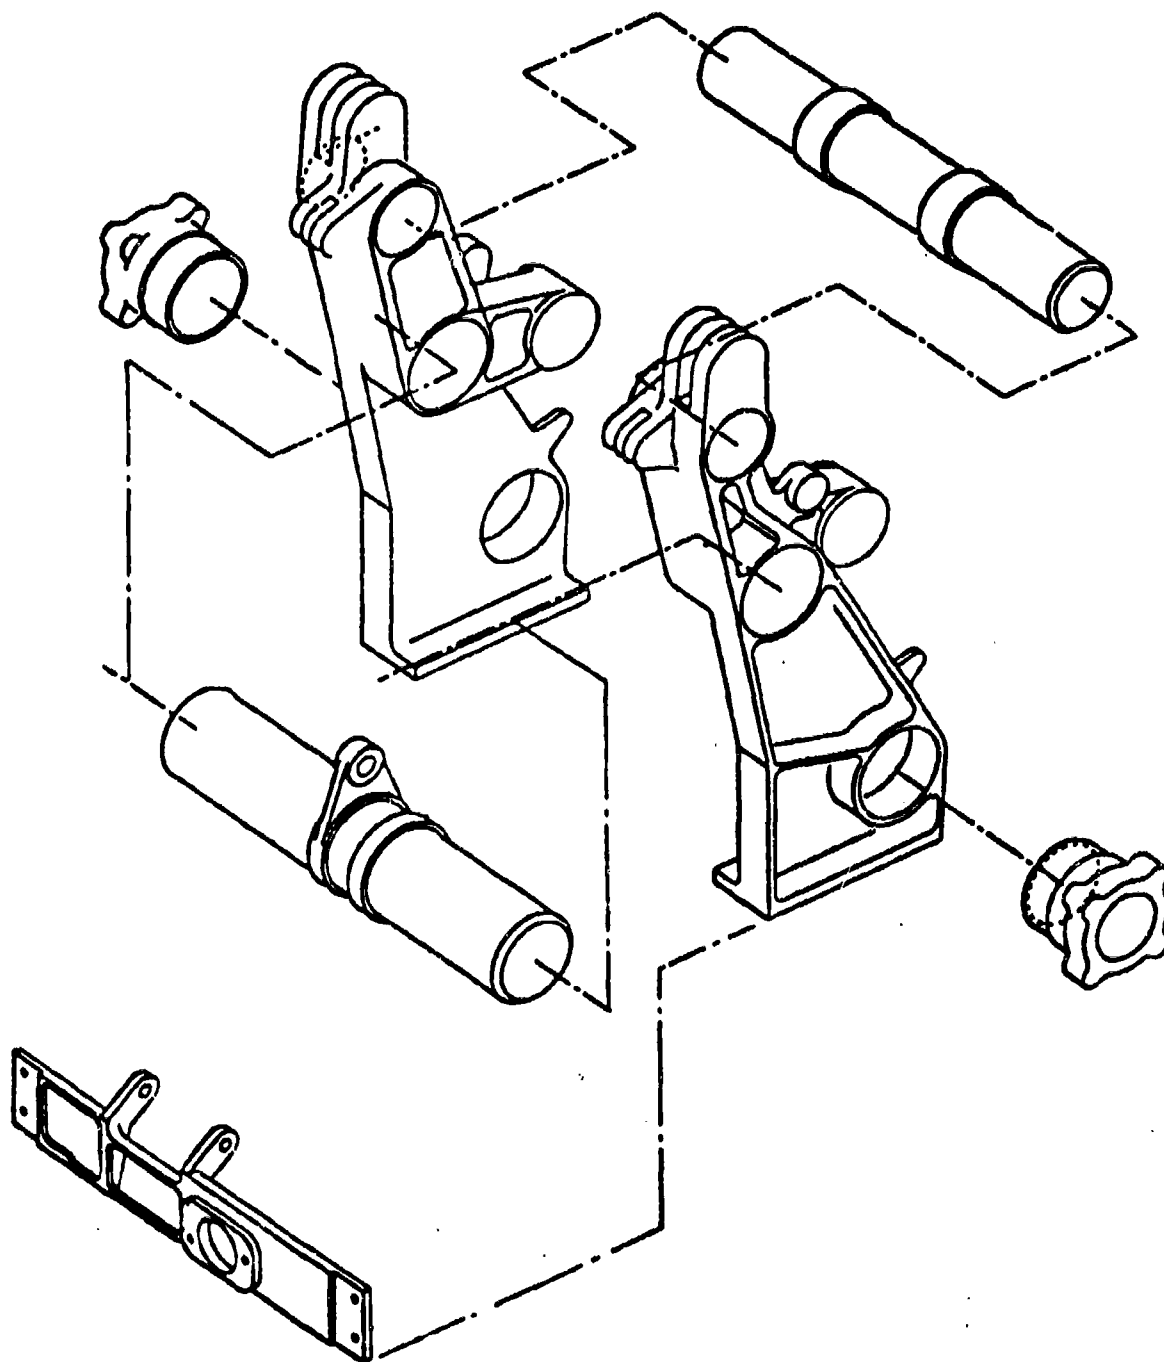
SUPPORT CANOPY MECHANISM, EXPLODED VIEW,
